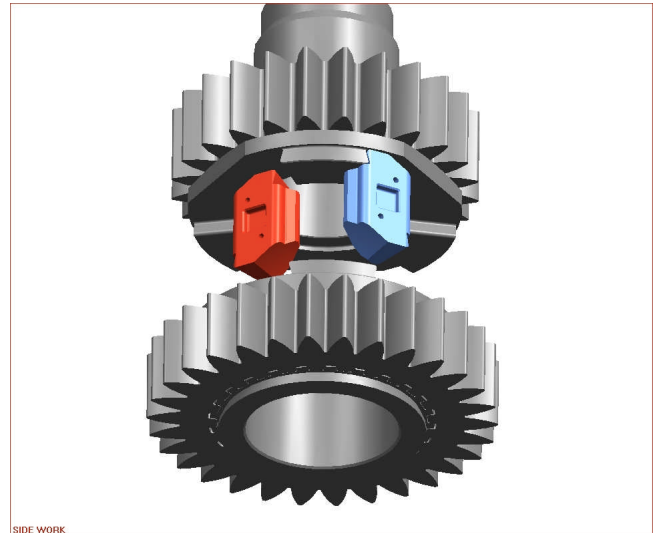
Actuate first ring to take up drive in 1<sup>st</sup> gear.
